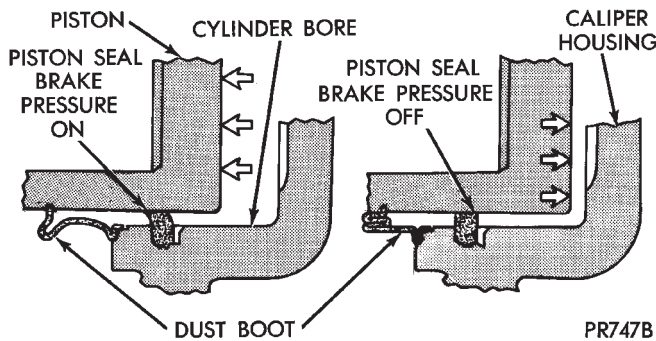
Caliper Piston Seal Function For Automatic Adjustment
